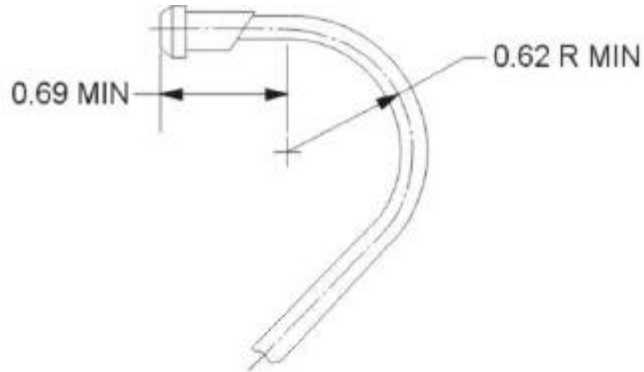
Fuel Line Showing Minimum Dimensions for Bending
